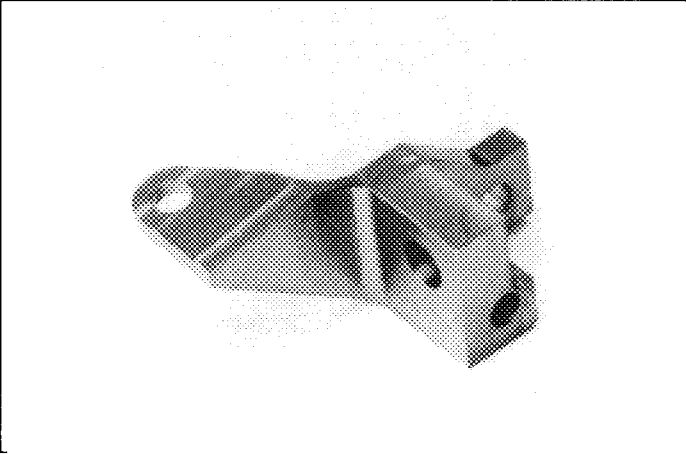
Heavy duty steering knuckle arm TYPE B
